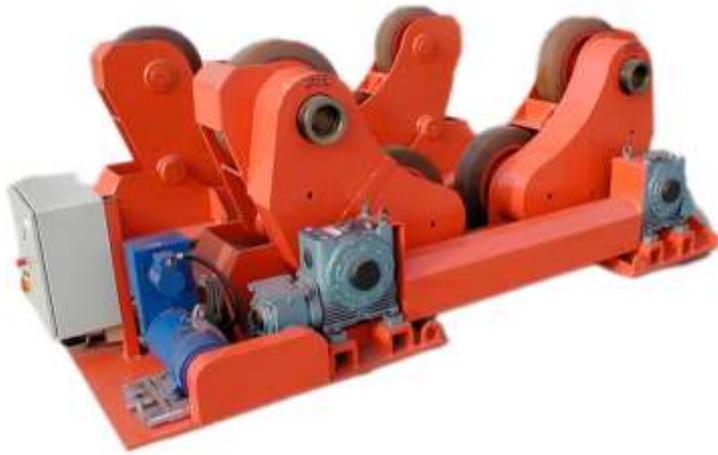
Self-aligning fixed rotator Bode drive & idler model SAR1200 [9]
